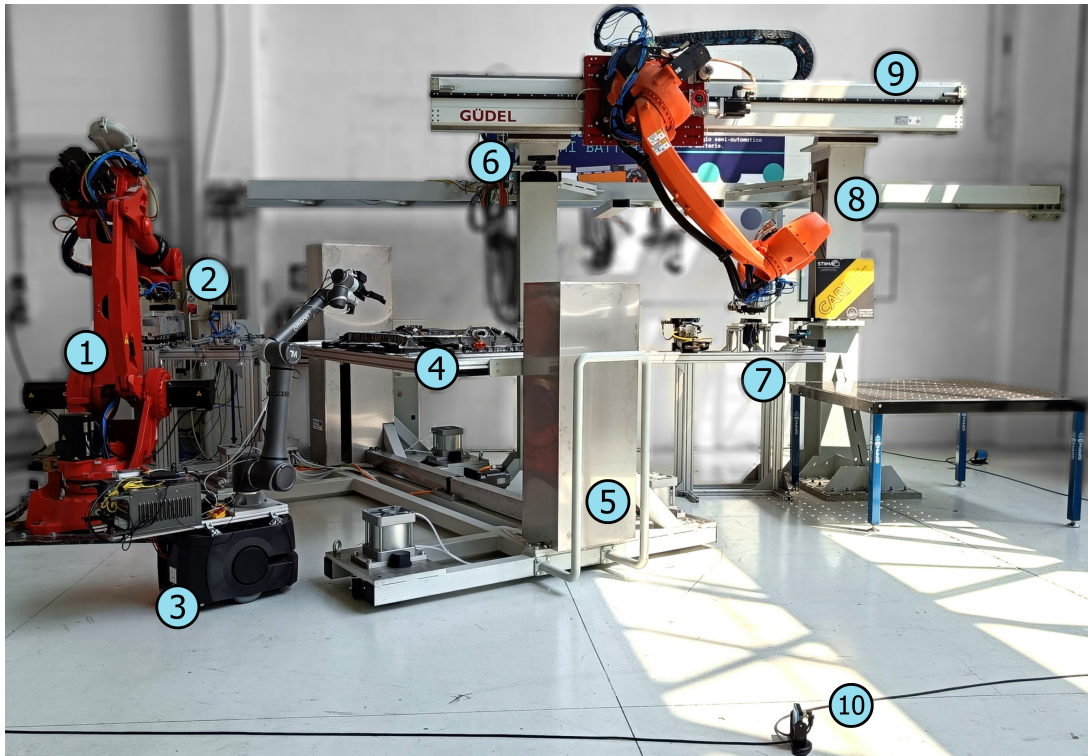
The multi-robot cell for battery disassembly. The main components are tagged as follows: (1) Robot 2 (COMAU), (2) Robot 2 tools, (3) Industrial Mobile Manipulator (OMRON + TECHMAN), (4) Battery Pack, (5) Battery Handling System, (6) ZED Camera, (7) Robot 1 tools, (8) Robot 1 (KUKA), (9) Linear Axis, and (10) Inxpect Radar.
